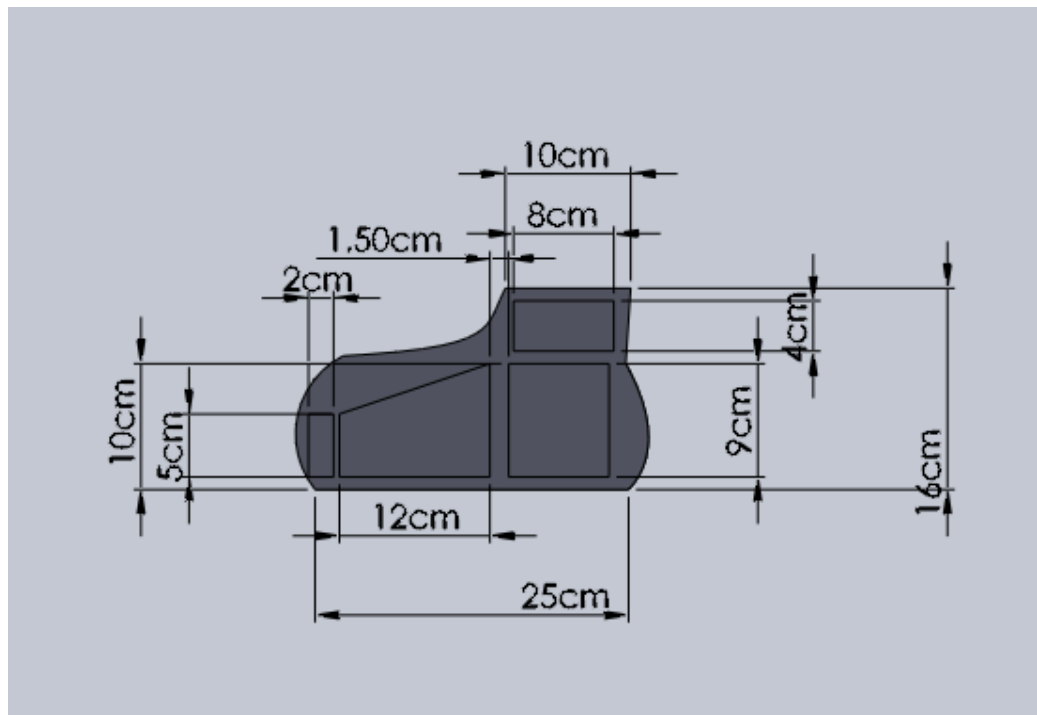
Cross section of interior and exterior side of foot for extrusion
